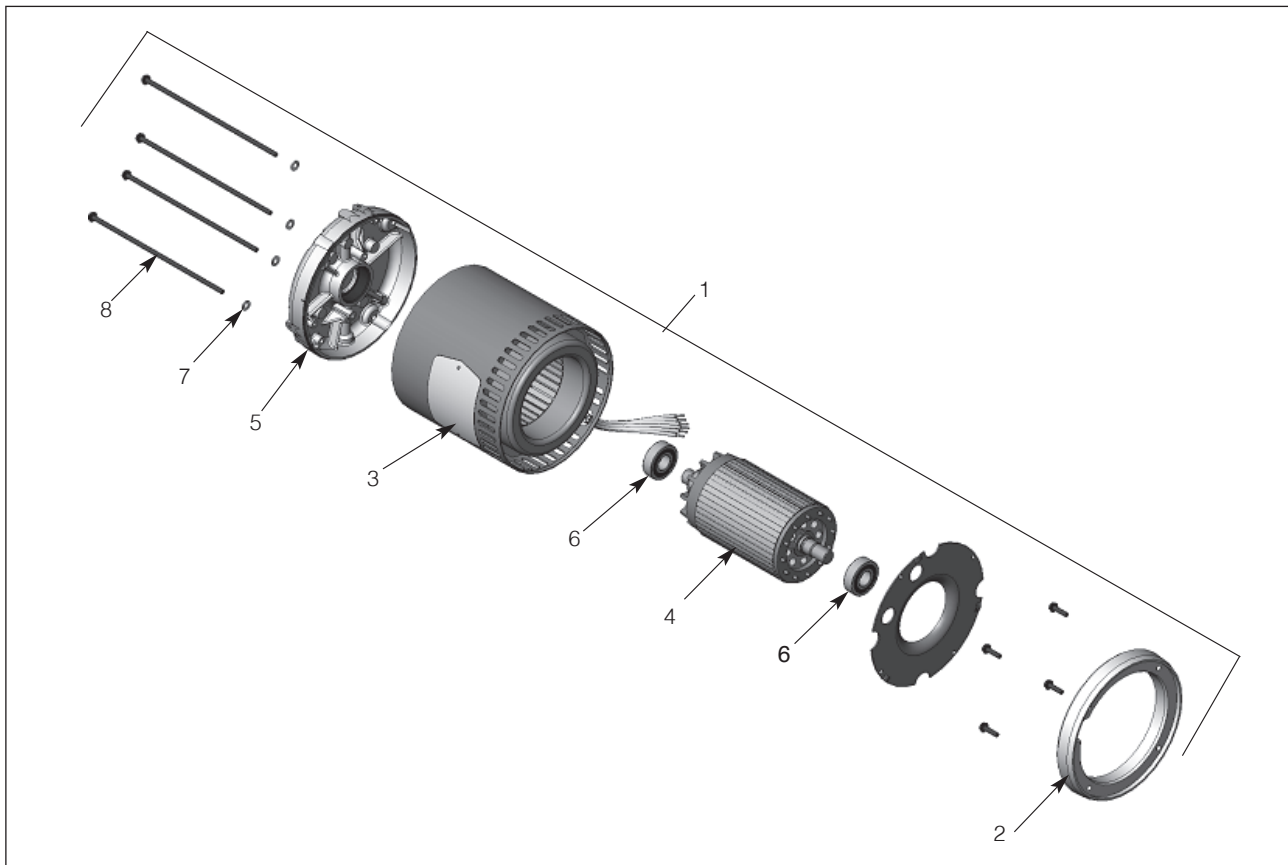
B MOTOR PARTS (TWO SPEED)
